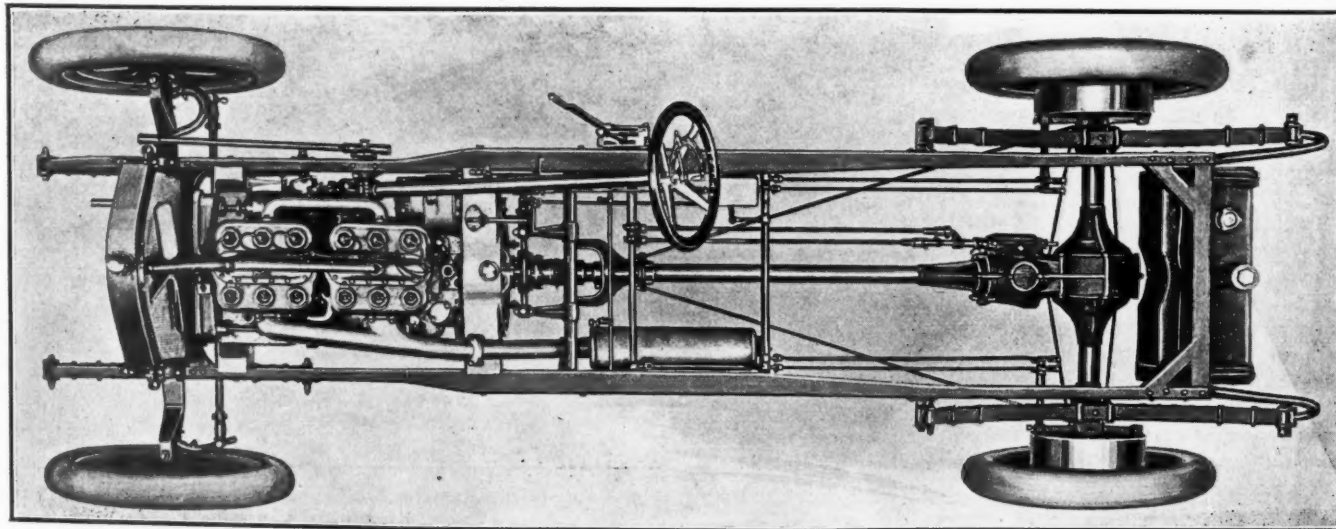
Plan view of the chassis of the new four-cylinder Stutz, showing sturdy construction
